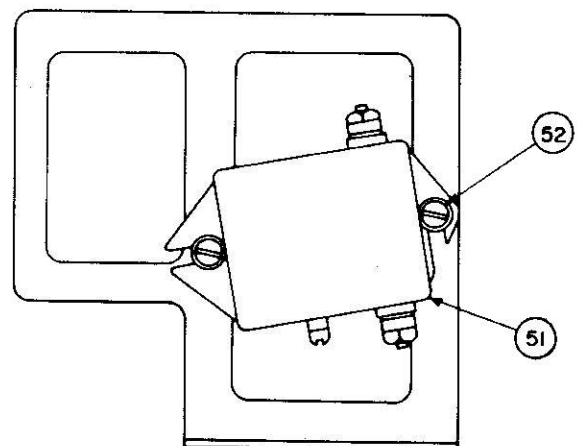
AUXILIARY BUZZER MOUNTING.
